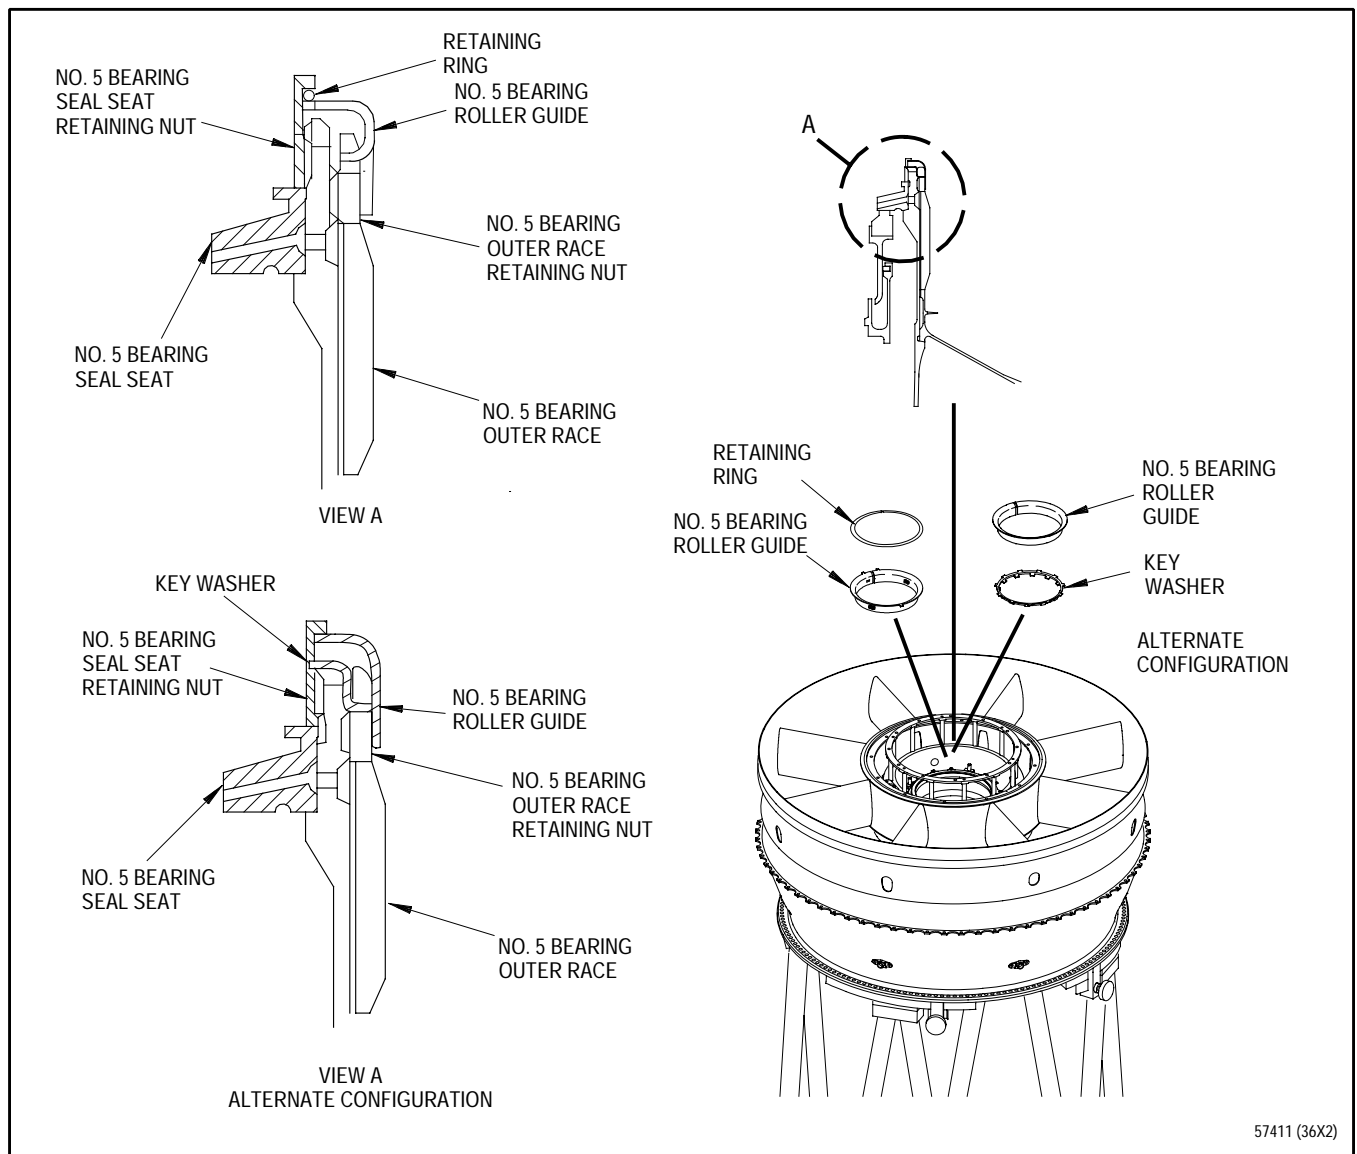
No. 5 Bearing Seal Seat and No. 5 Bearing Seal Seat Nut - Installation (Sheet 2 of 3)
